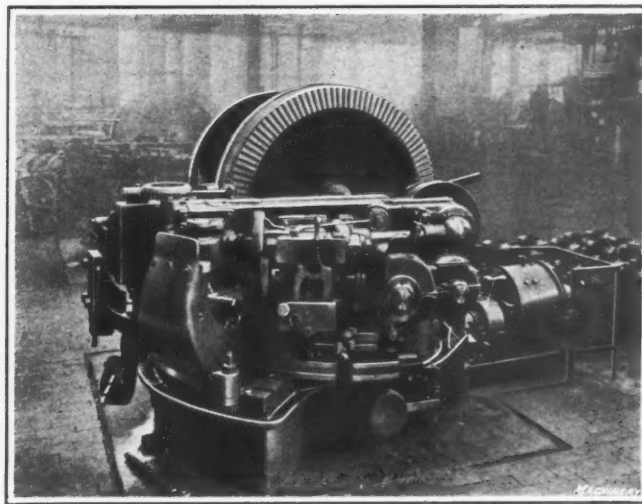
Gleason Templet Gear Planer planing Bevel Main Drive Gears
